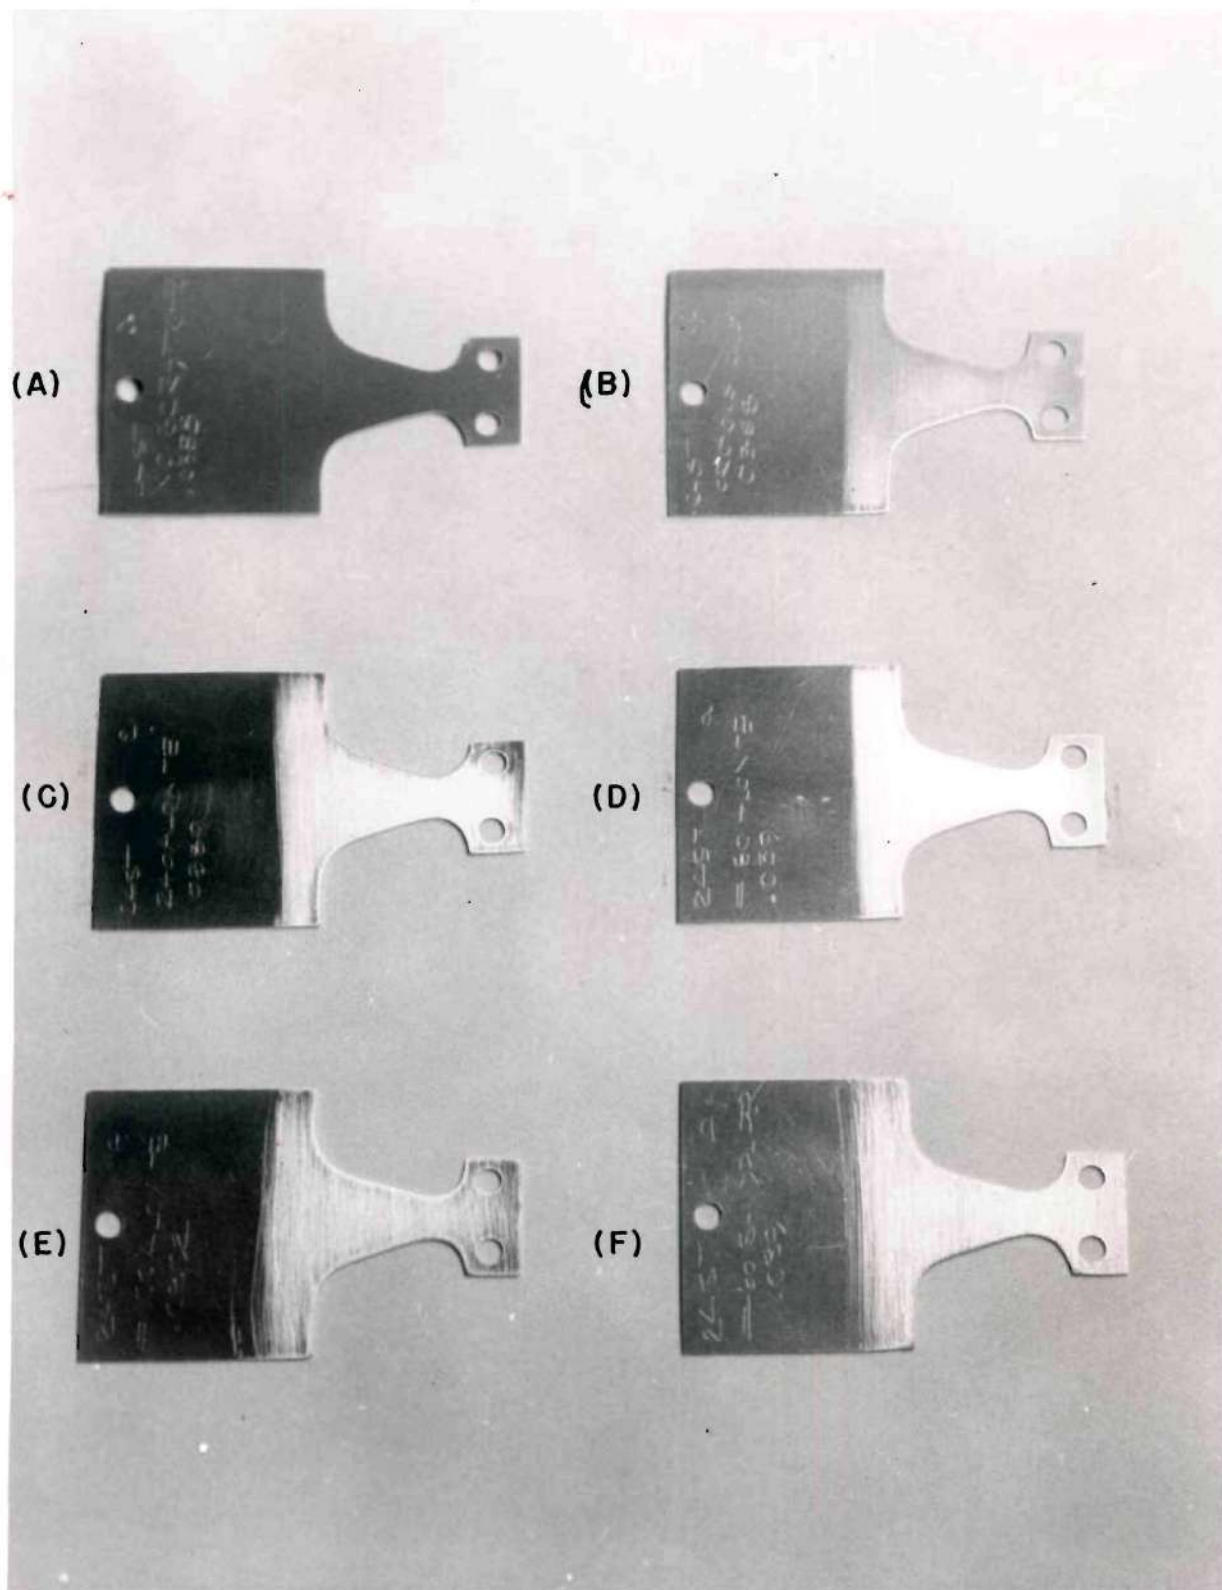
FRACTURED 24S-T ALCLAD SPECIMENS
